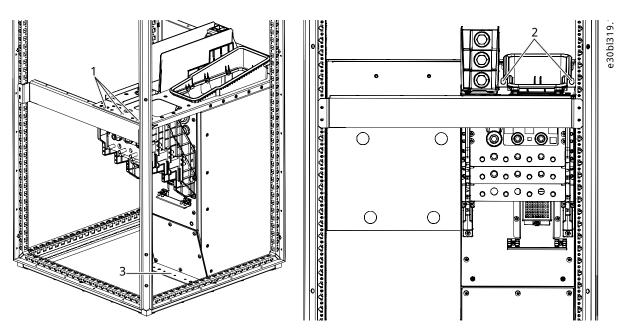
Installing the Standard Integration Unit into the Cabinet, IR10, IR11
